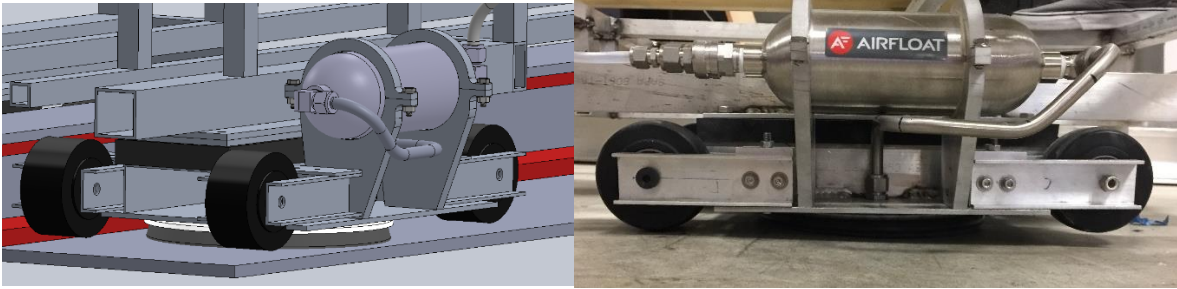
a) SolidWorks design of air bearing skid showing secondary wheels and hop tank. b) Picture of actual air bearing skid built to specifications, attached to the pod with rubber inserts.
